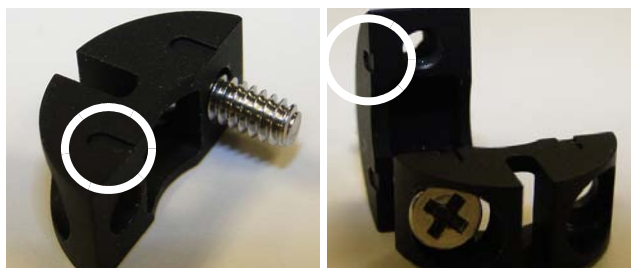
2. Notched Wheel Half with Screw Inserted
